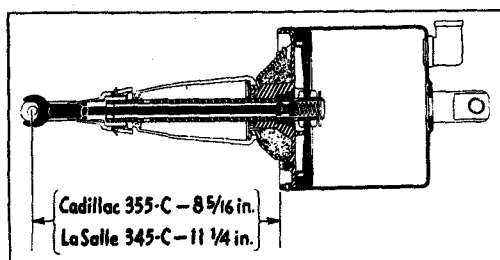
Operating tube clevis adjustment for Cadillac V-8 and La Salle brake assister
